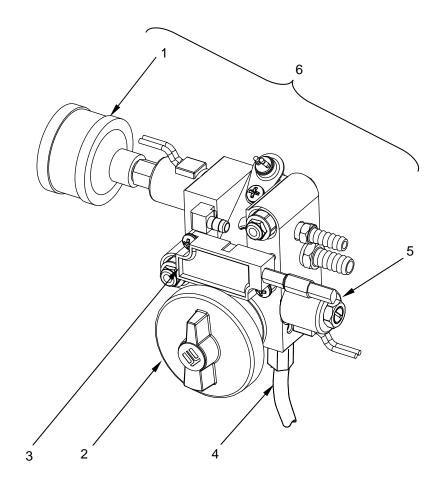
Replacing Parts Without Removing Fuel Delivery Block (MBU-V3 shown).
